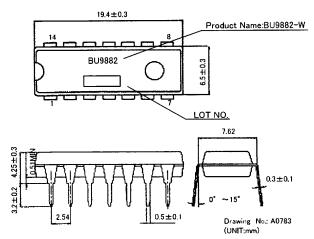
(a) PHYSICAL DIMENSION DIP14 (BU9882-W)
